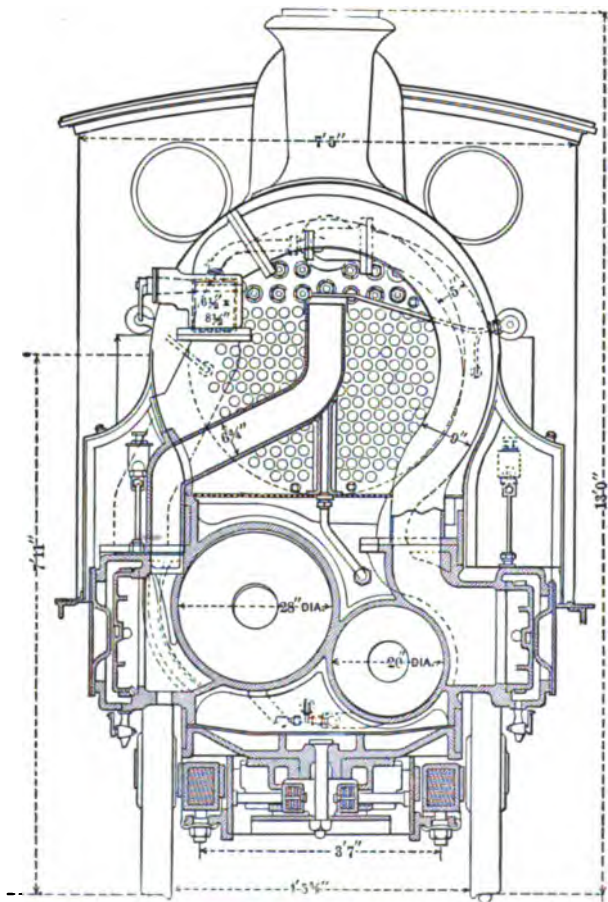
Elevation and Cross-section of Two-cylinder Compound.
